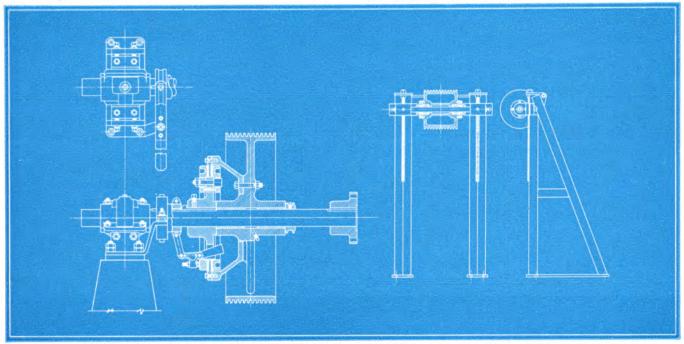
CLUTCH shaft for single cylinder gas engine drive and usual tightener for same
